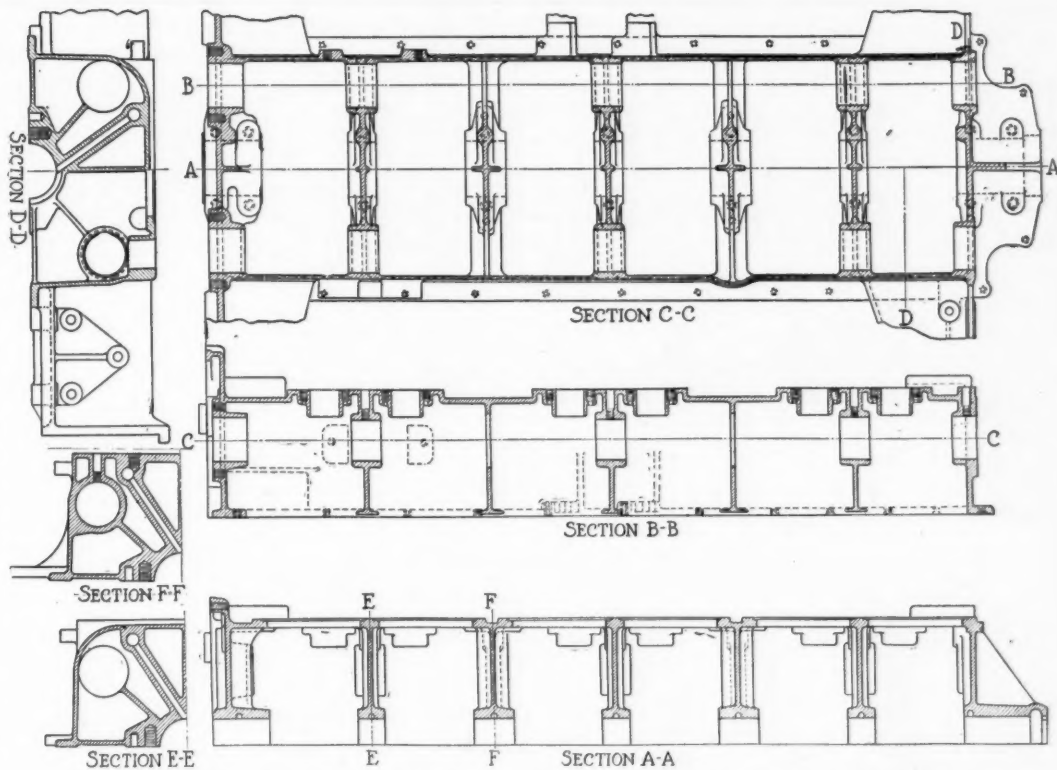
Locomobile bronze crankcase in which engine oil pan is considered part of reinforcement
